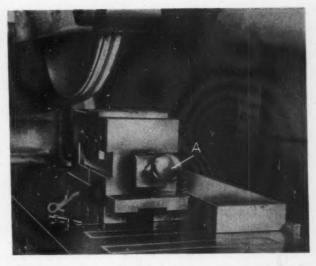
This Set-up on an Abrasive No. 3. S. Machine Provides for Grinding the Edge-face at the End of One Arm of a Drive Pawl Pressing, and a 0·020/0·026-in. Radius at the End of the Other Arm. The Edge-face must be at 90 deg. to the Second Arm, and the Radius-end must be at a Specified Distance from a Pivot Hole, Within Close Limits
